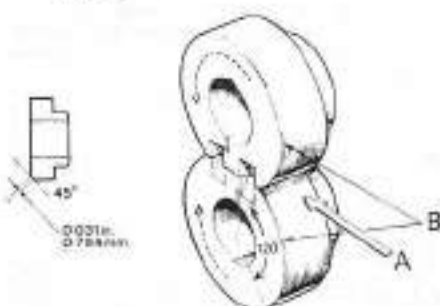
When installing new bearings in worn pump, inlet (A) side of inner bearings should be chamfered at (B) as shown in inset.
